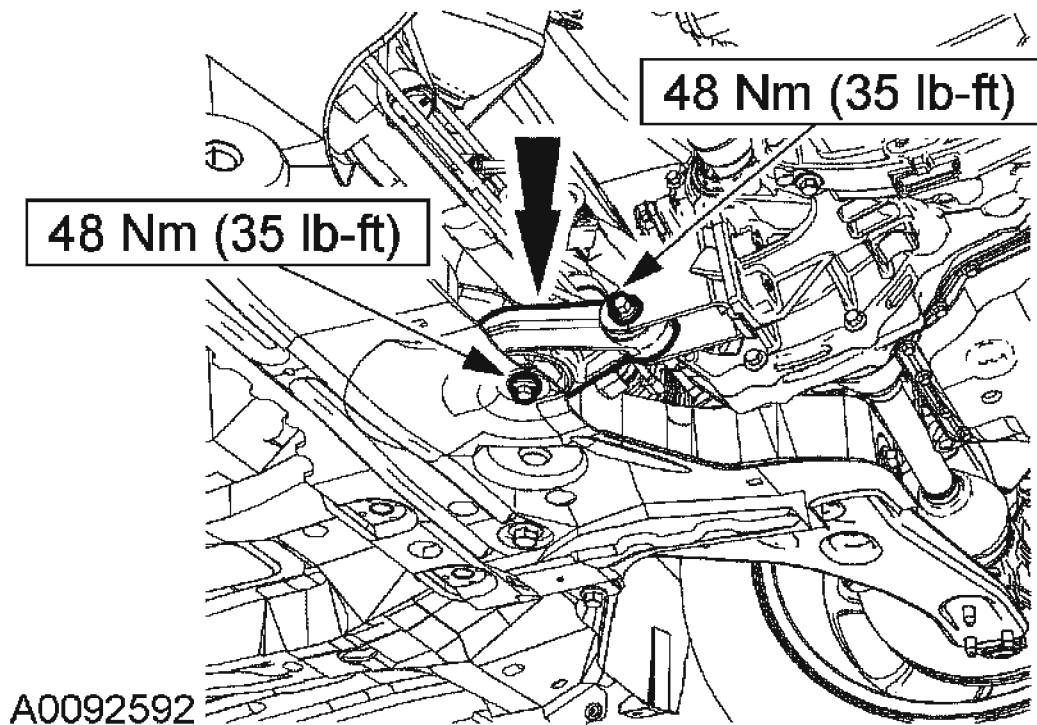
Installing Transaxle Roll Restrictor And Bolts
